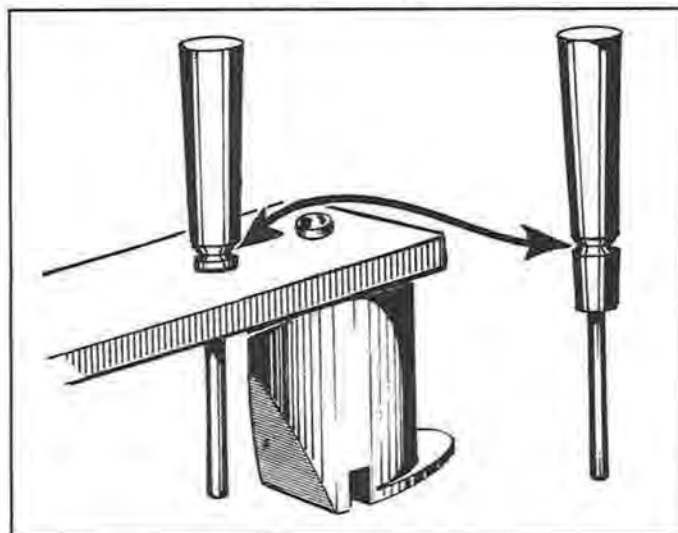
Groove is cut into section of the taper just above the point where it enters hole to facilitate breaking off this portion.
